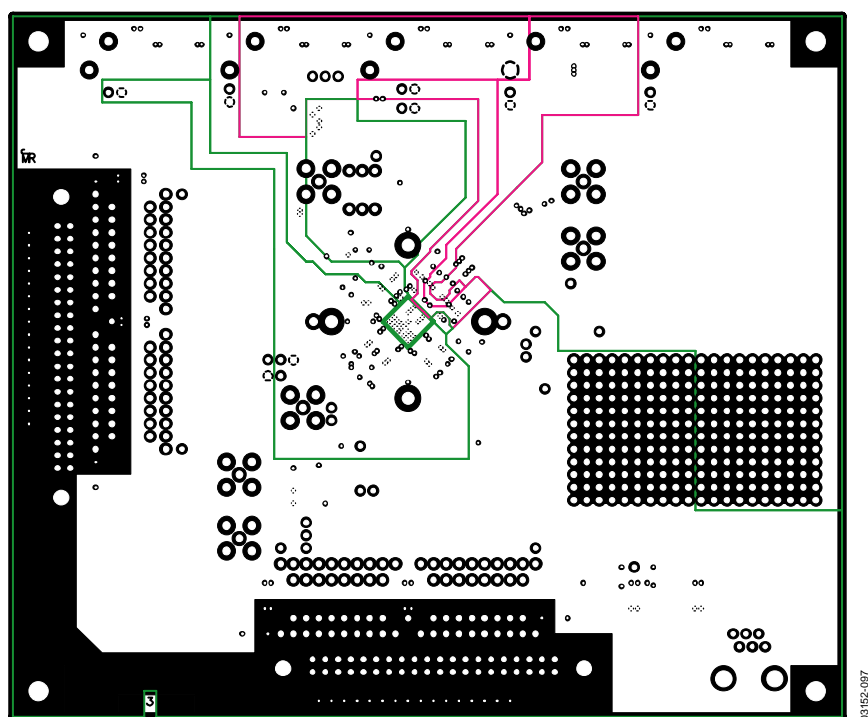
PCB Assembly, Layer 3 Metal (Power Plane), Rev. F Evaluation Board
